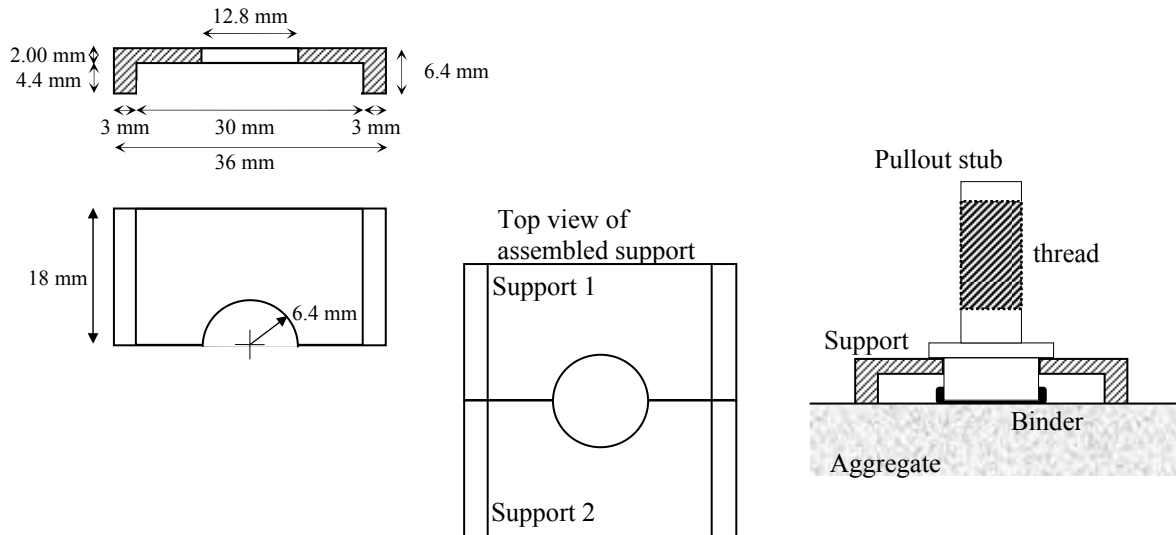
2. Illustration. Details of the split pullout stub support and assembled aggregate, binder, support and pullout stub.
